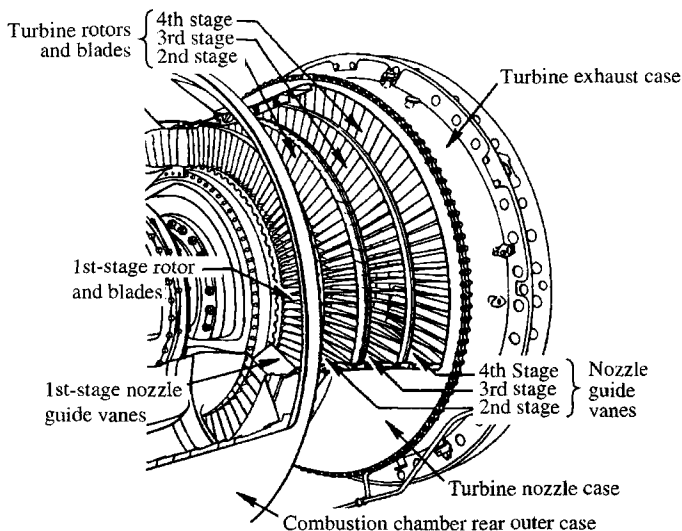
Isometric section of multistage turbine. (Courtesy of Pratt & Whitney.)
